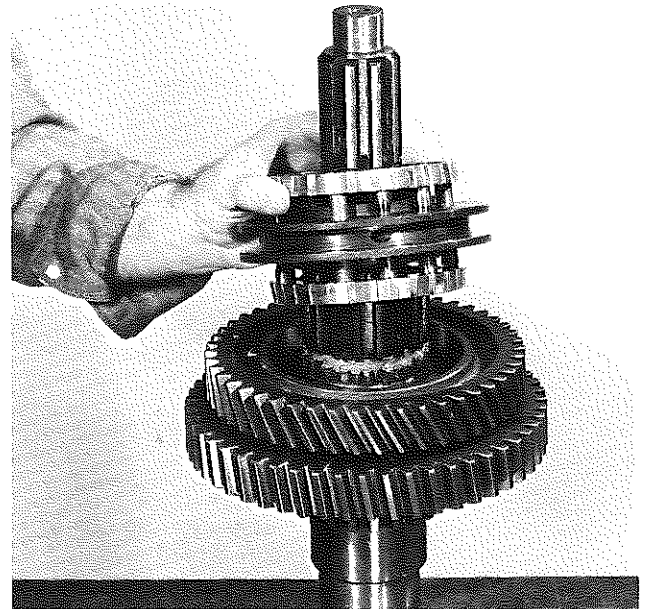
Assembling 2nd-3rd Speed Synchronizer
